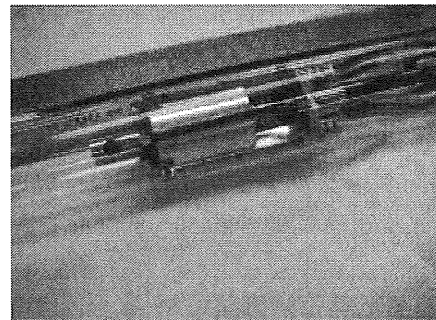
Laser Processing Head in 1-inch Acryl Pipe
